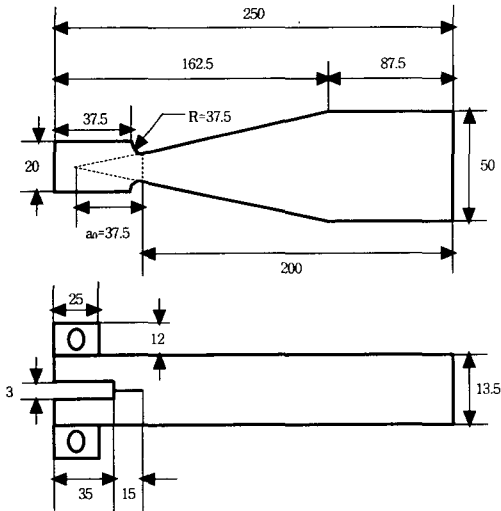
Width tapered double cantilever beam (WT-DCB) specimen configuration with loading tap.
